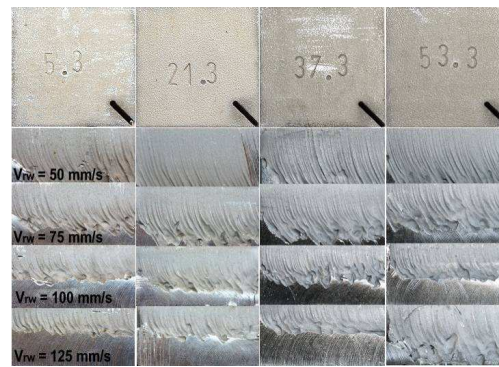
Surface view of selected test samples cut with abrasive amount of 150 g/min
